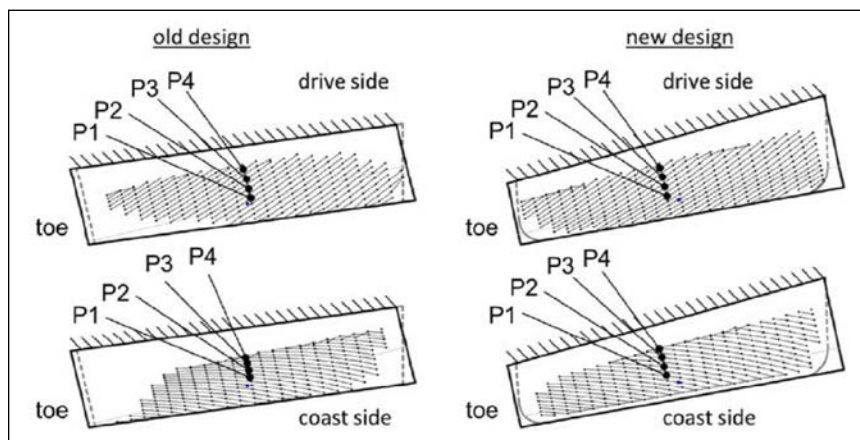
Contact pattern and calculated contact points on the wheel flanks.
